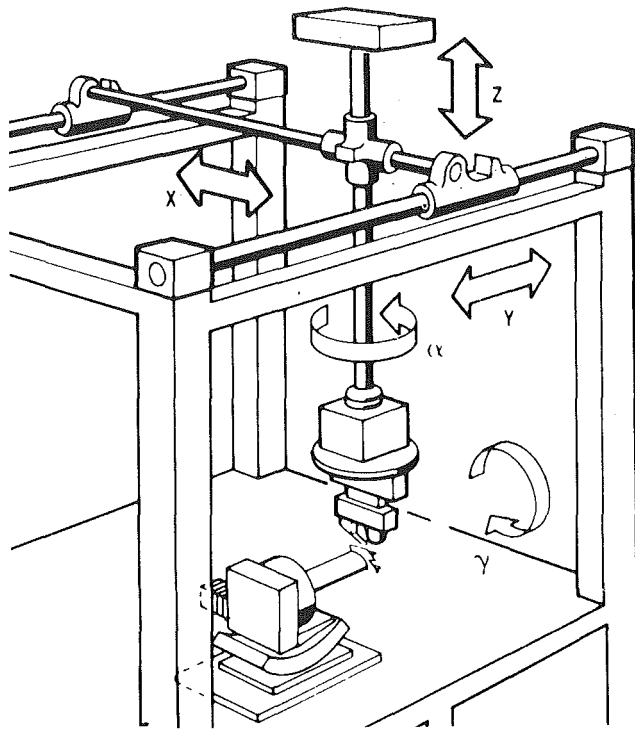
Sketch showing the control axes utilized in the automatic blade welding system
